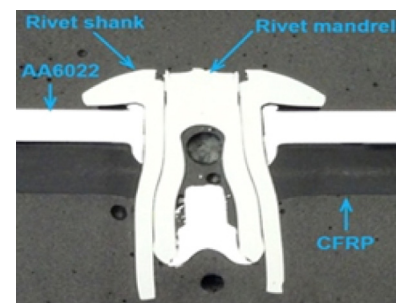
Friction stir blind rivet in a CFRP-Al joint.
